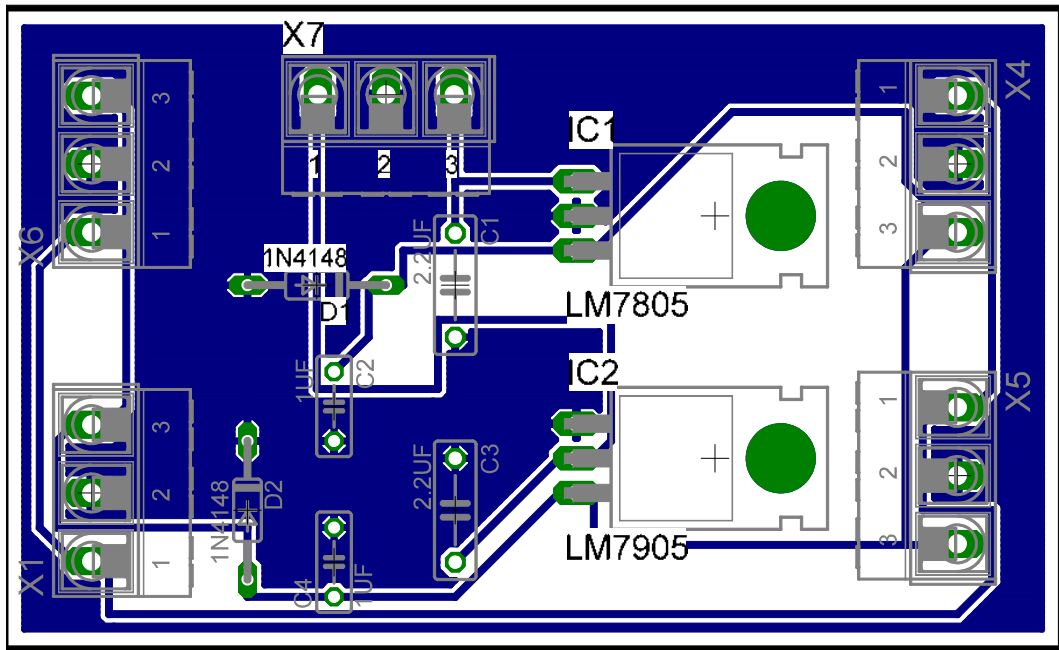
The Power Supply Conditioning Circuit Board (Eagle CAD)
